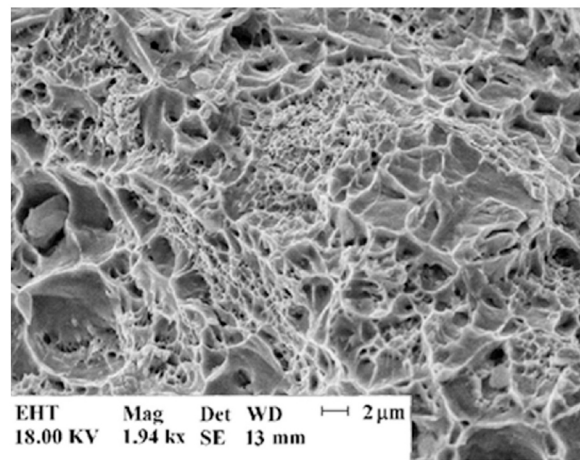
SEM fractograph of the fractured tensile specimen, ER309L.
